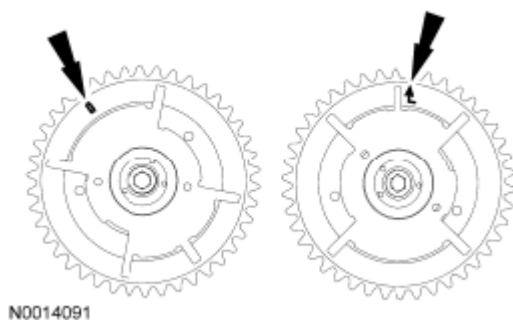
Locating RH Camshaft Sprocket Timing Mark
